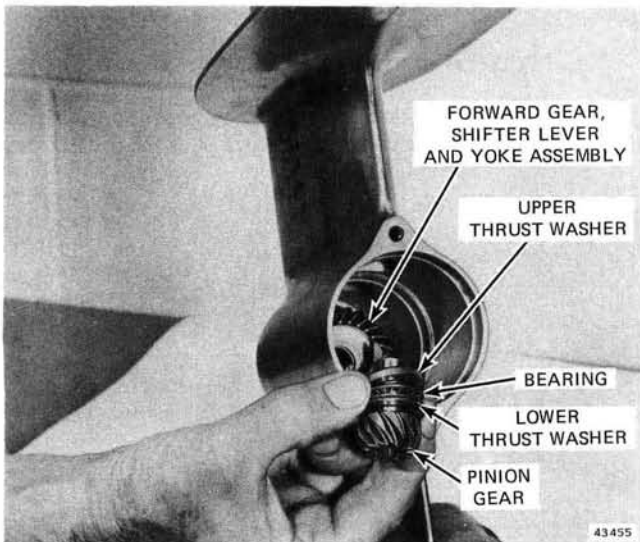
Removing Pinion Gear, Bearing and Thrust Washers
